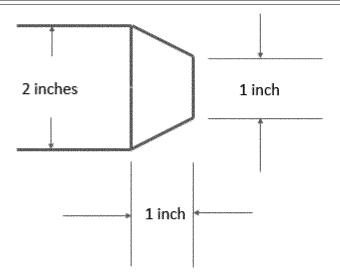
Illustration of Debris Penetrator Test Dowel Tip Taper
